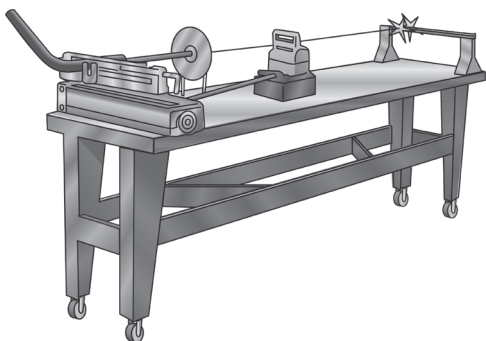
Hydraulic bender with portable table for mandrel bending
